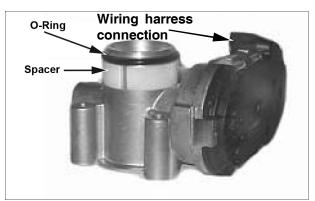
O-Ring and Spacer Within Mixer Adapter Assembly
